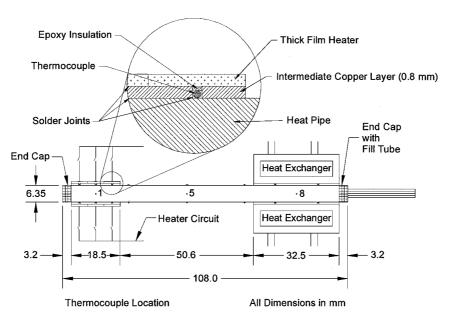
Heater, cooler, and thermocouple mounting arrangements.
